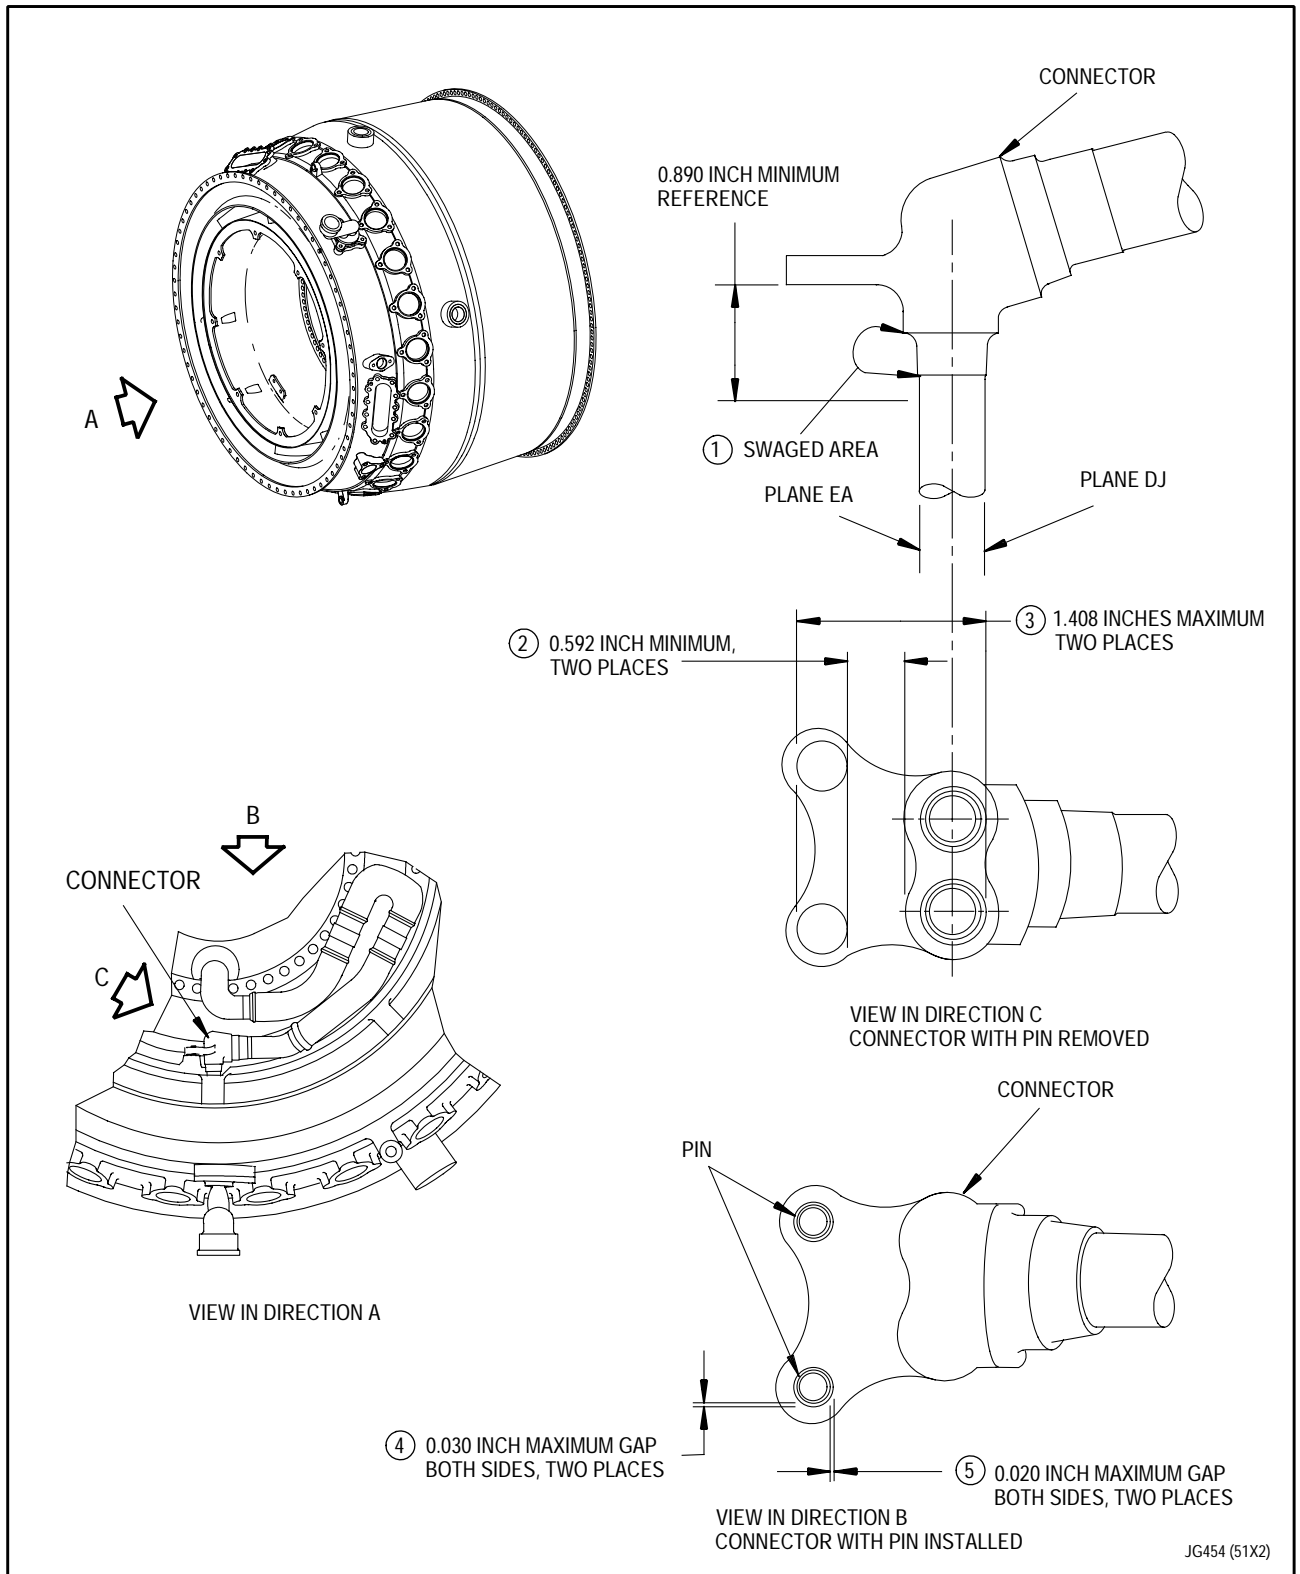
No. 4 Bearing Internal Scavenge Tube Assembly - Anti-Rotation Pin Hole Inspection
